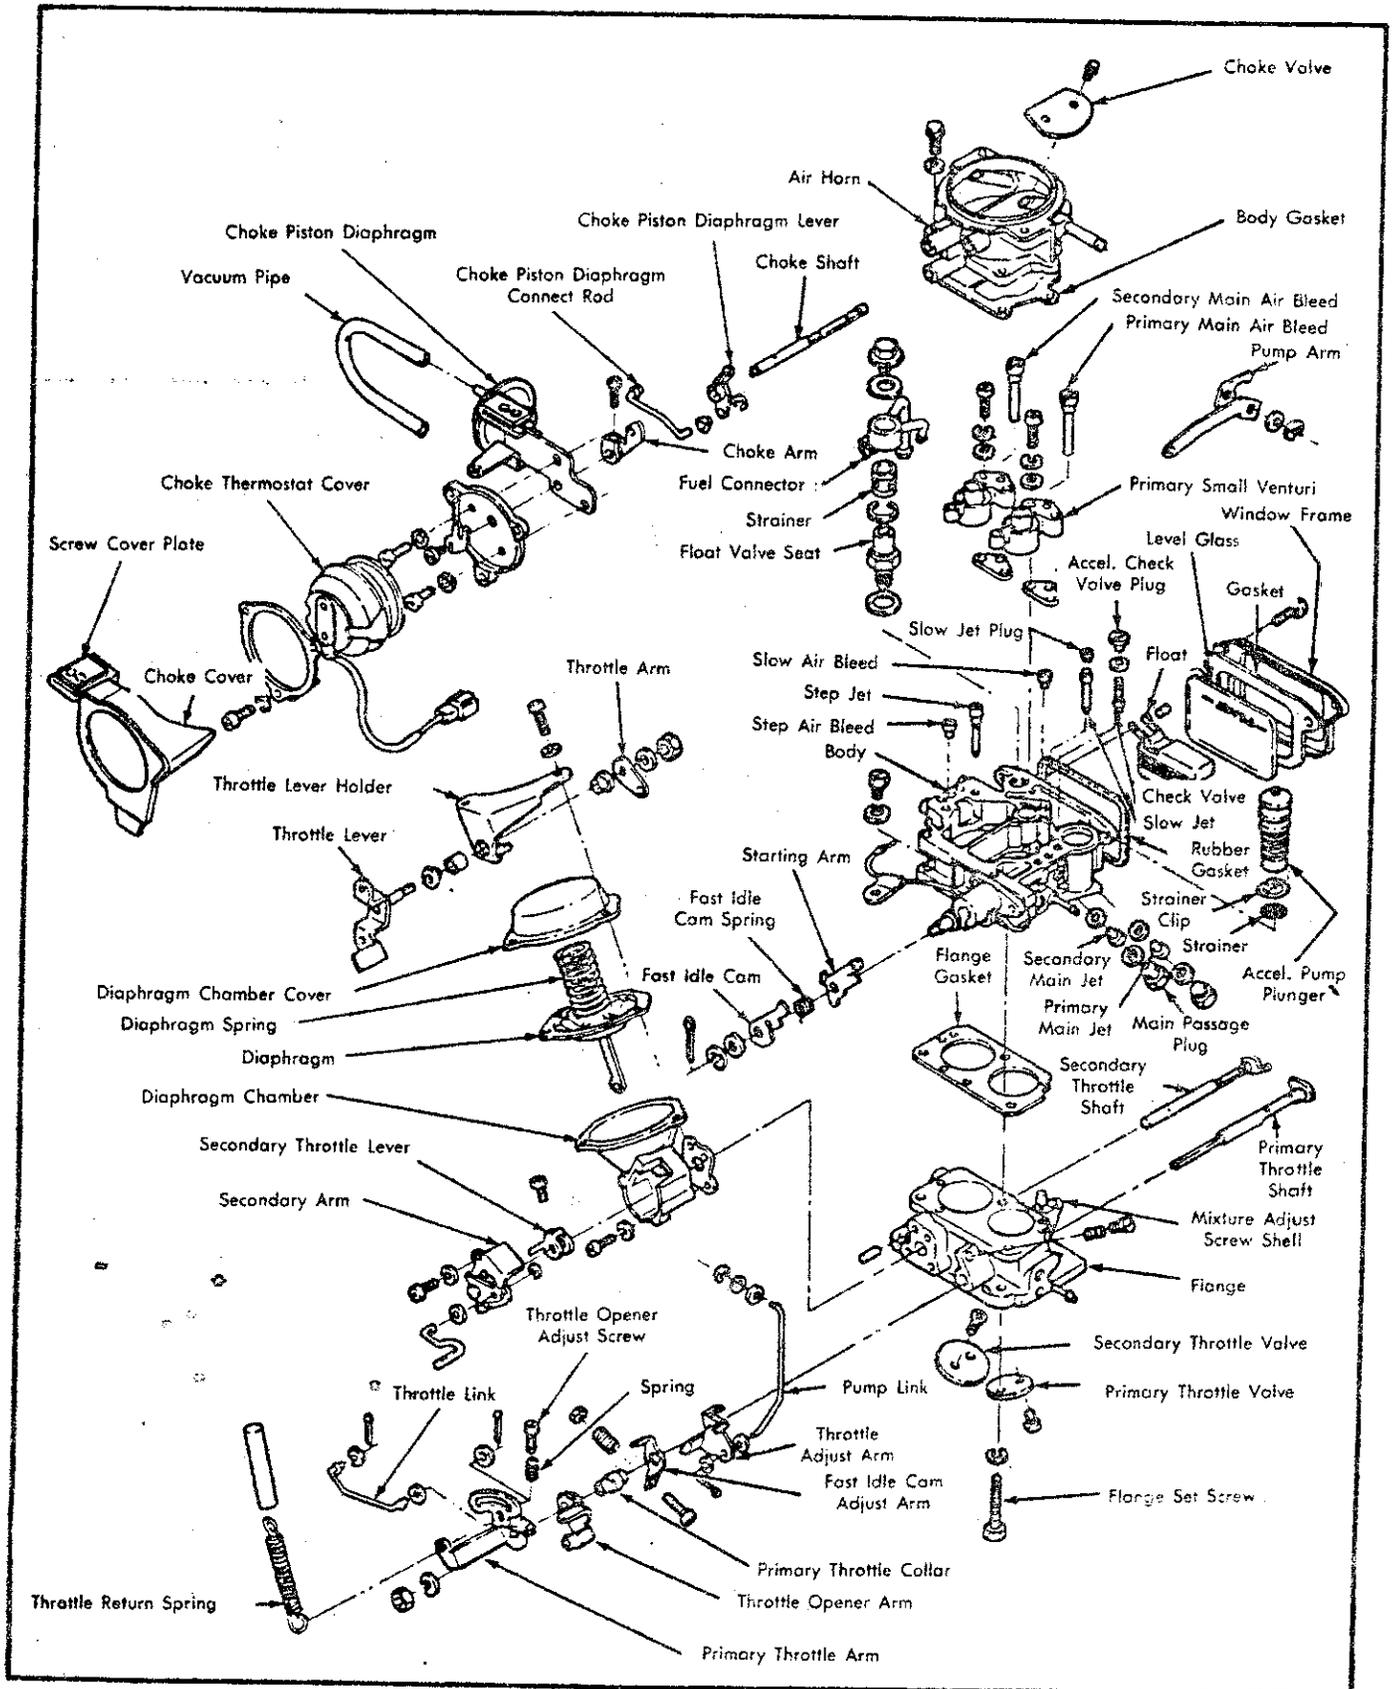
Exploded View of Hitachi DCS 328 2-Barrel Carburetor (Ford Courier 2000)
